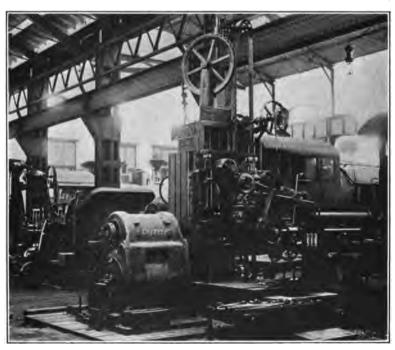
Boring valve chamber in cylinder, Southern Pacific Shops, Sacramento, using big draw-cut machine.
